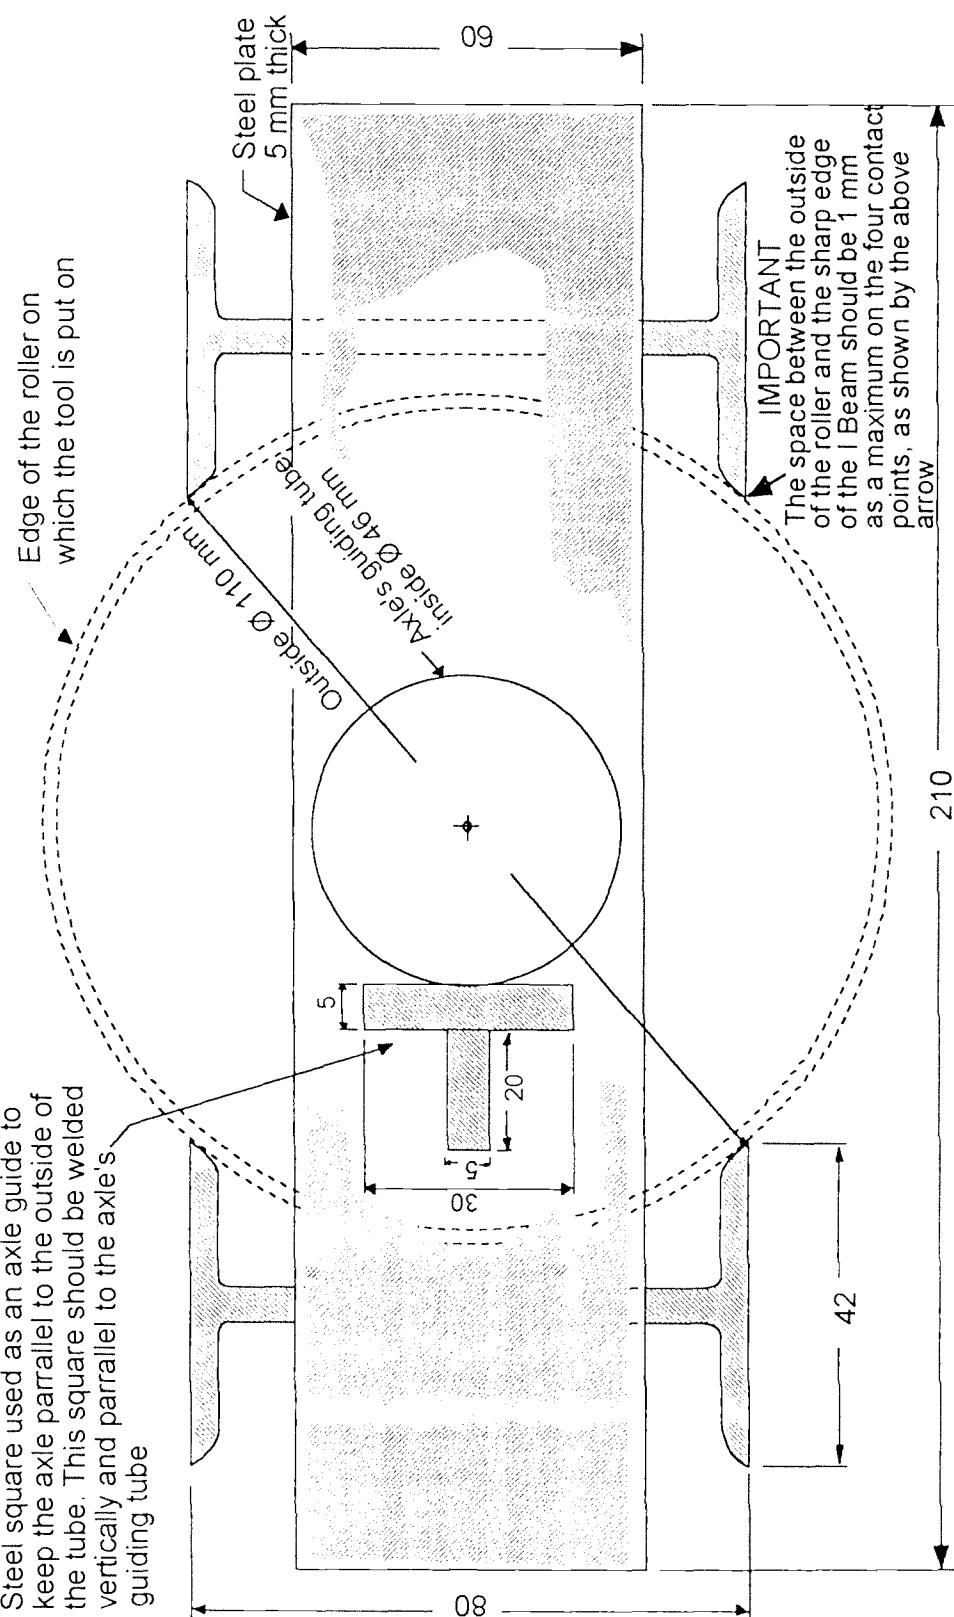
ELEVATED VIEW OF THE POSITIONNING TOOL FOR THE SLIPWAY'S ROLLER AXLES
